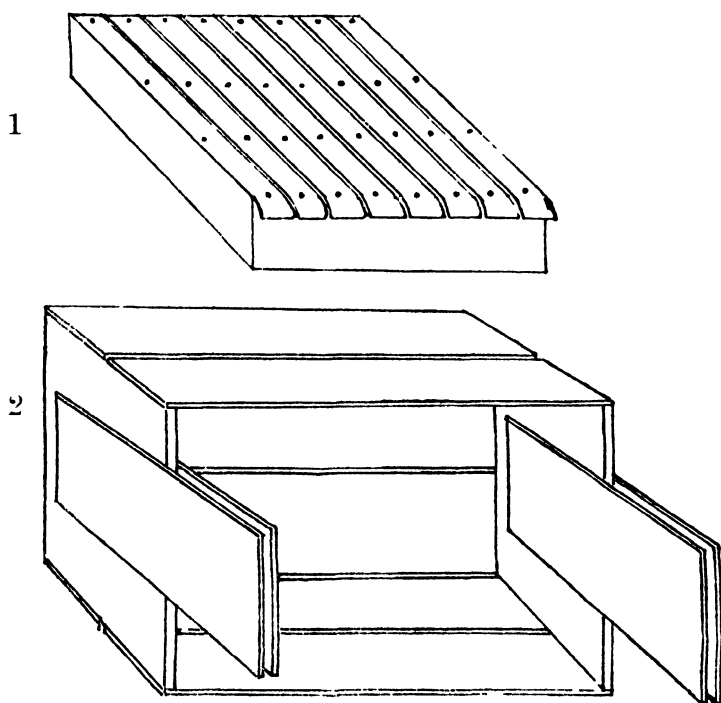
Nail Stripper : FIG. 2.—Box-Making Device.
